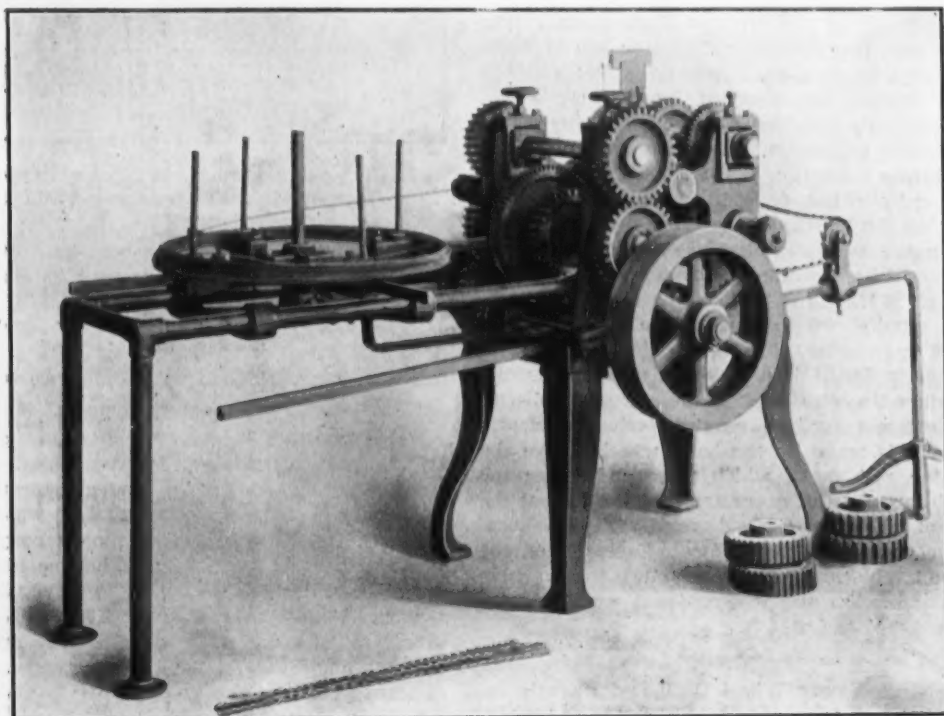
Opposite Side of the Smurr & Kamen Automatic Wire Crimper.
